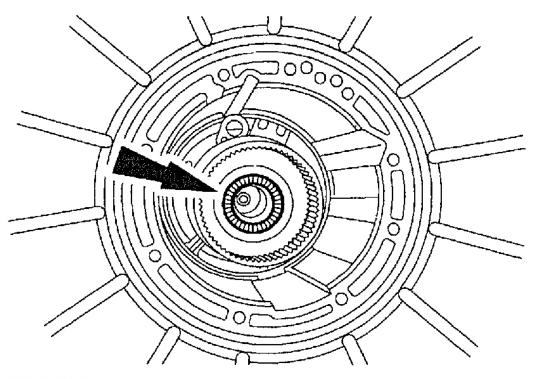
Removing Planetary Gear Overdrive Carrier
